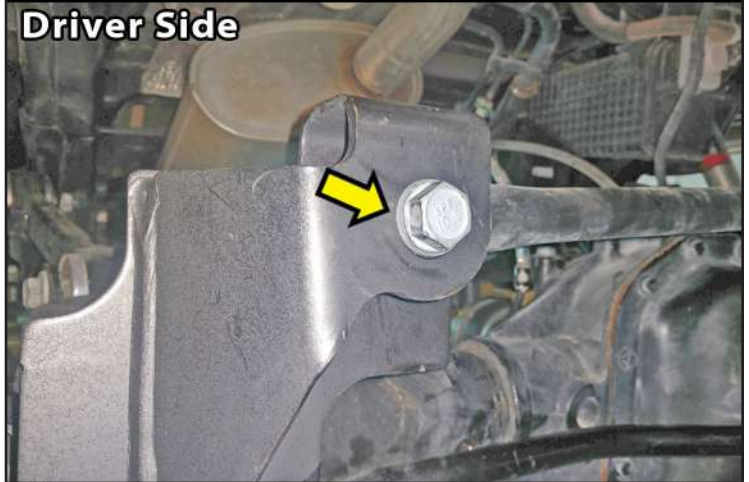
Install Rear Brake Line Bracket...43. RUBICONS: RECONNECT REAR LOCKER...
